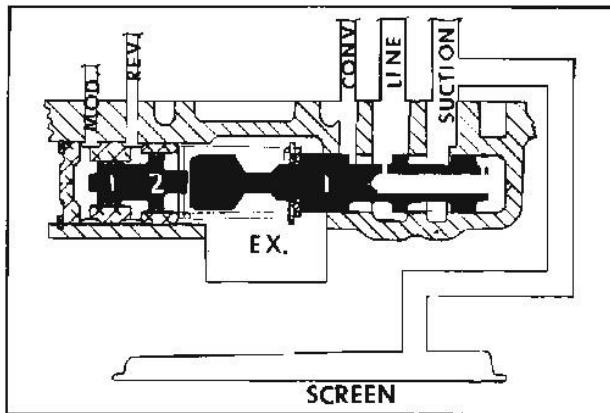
B-8 Main Pressure Regulator Valve - At Idle
